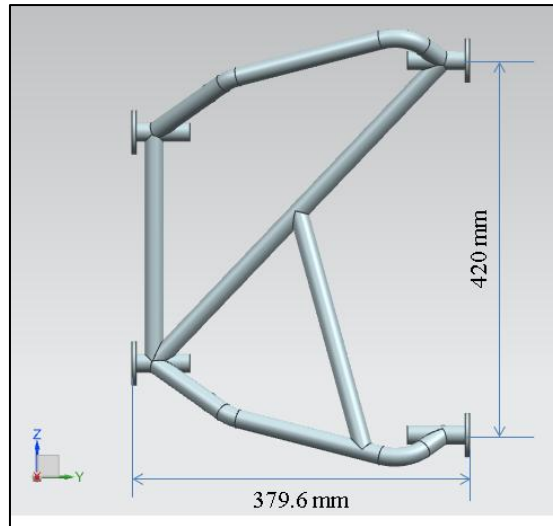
Side View of the Engine Mount Frame CAD Modelled in UGNX 12.0
